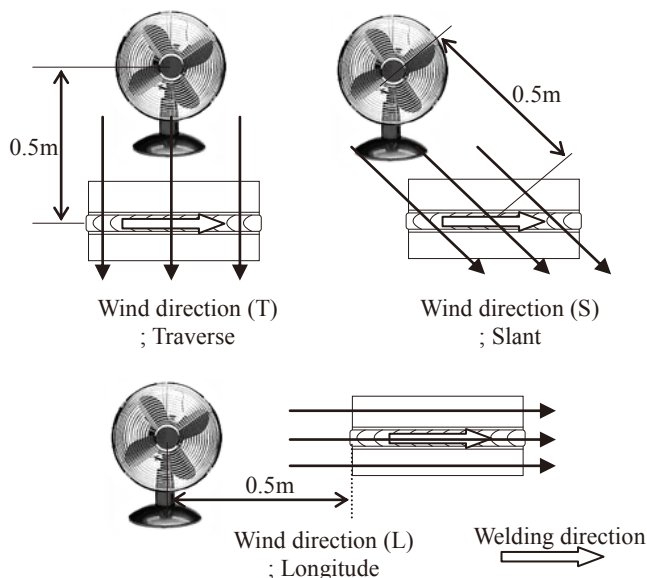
Electrical fan and weld test plate positions and the wind directions
